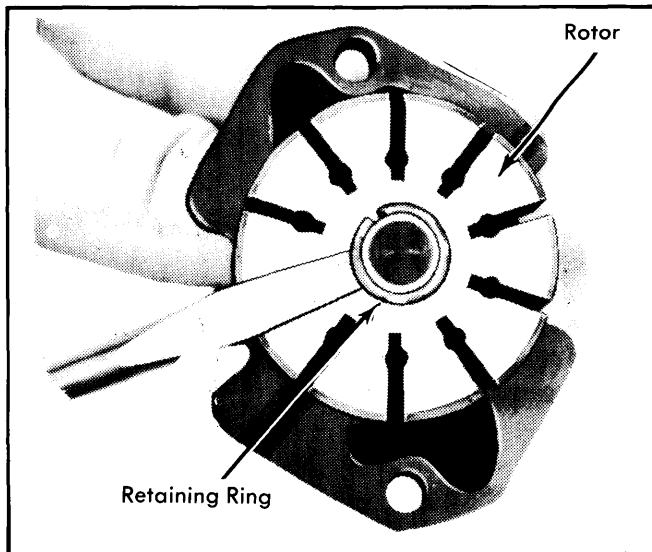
Disengaging and Removing Retaining Ring for End Plate of Pump
